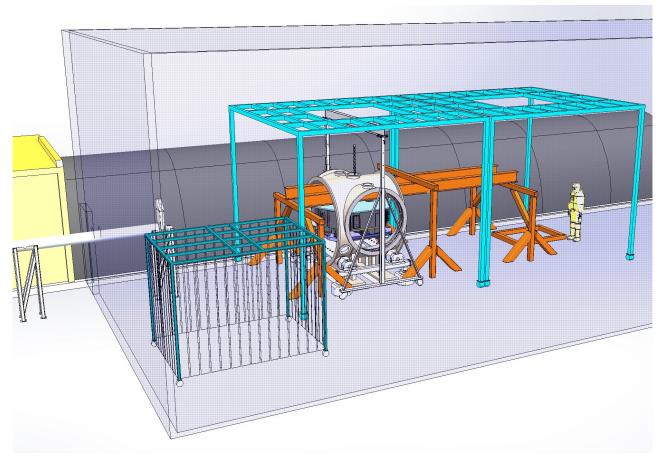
HAM8 chamber and support equipment in FCVEA, configured for installation of internal chamber payload.
